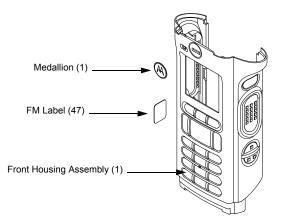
Main Housing Assembly (Dual Display Version, Full Keypad)
